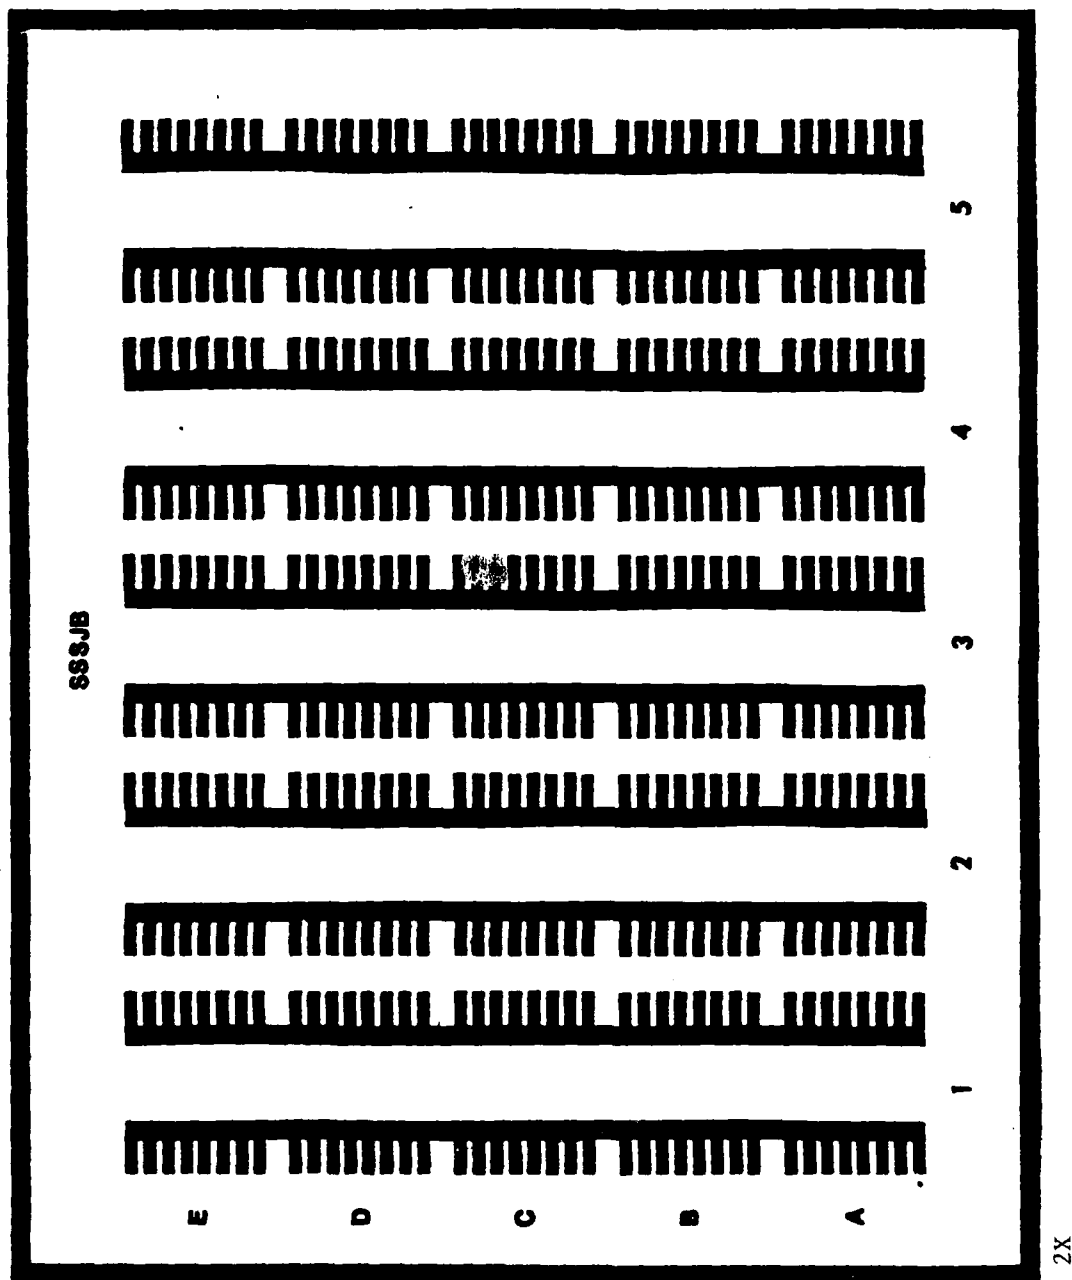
PRINTED CIRCUIT BOARD LAYOUT FOR STANDARD SOLDER JOINTS
